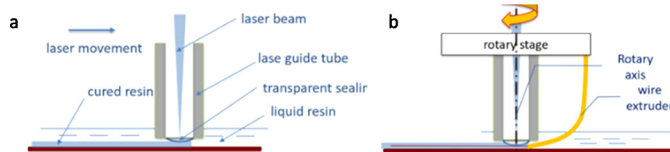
shows the schematic illustration of a SMA wire bending process, including the wire bending unit and an immersed VPP tool related to the SMA wire. The wire bending unit extrudes and twists the SMA wire so the wire can be deformed into the designed shape defined by the CAD model. The immersed VPP tool builds solidified fixtures using the liquid photocurable resin to facilitate the bending of the SMA wire and to maintain its shape during the SMA wire training process with a raised temperature over 500 °C.
